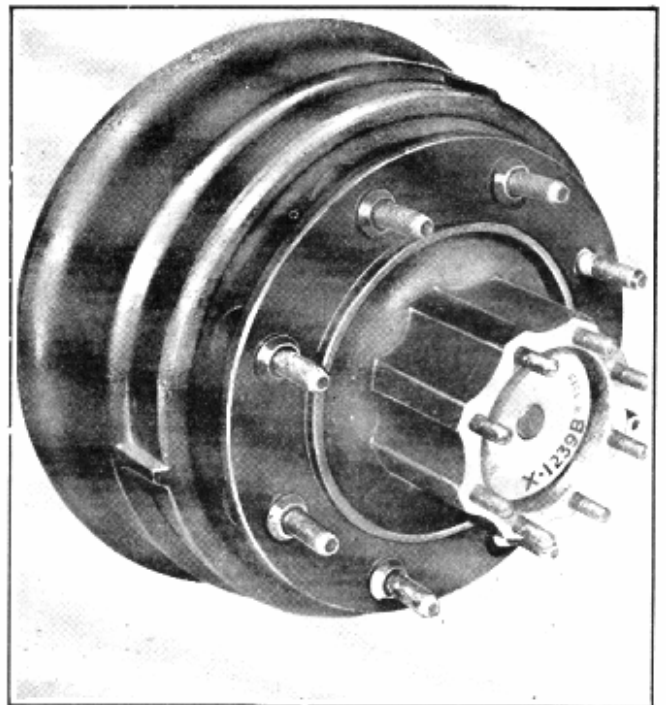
Installing the Outer Bearing Race Using Tool No. X-1239-B
